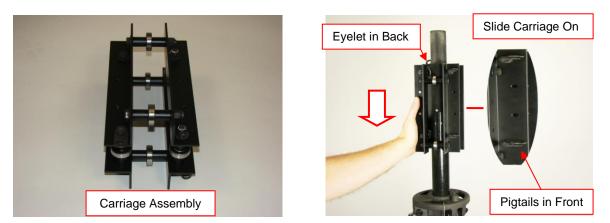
Slide Carriage Assembly onto the Top Tube
